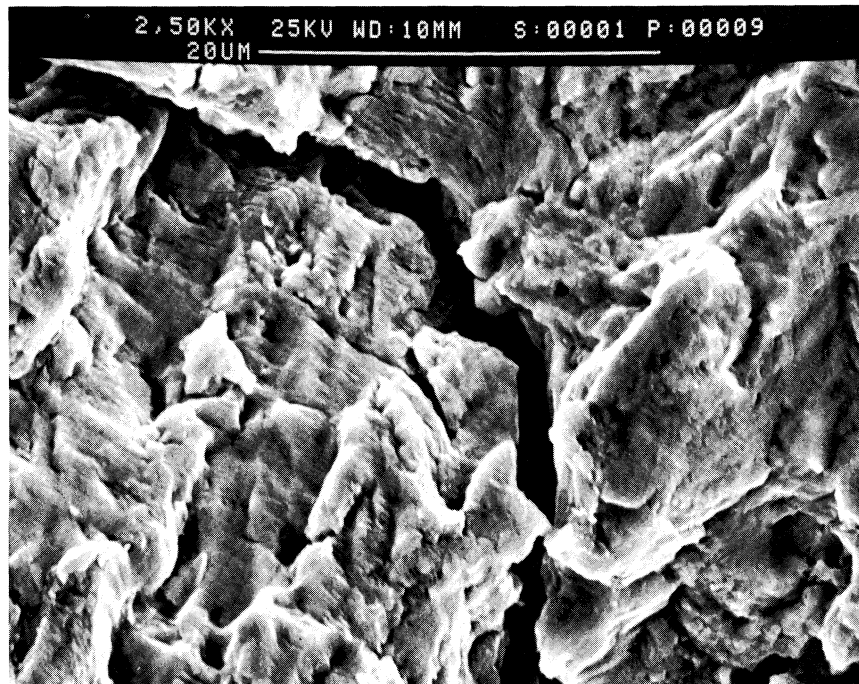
Striations on fatigue fracture surface. Arrow shows direction of crack growth.
